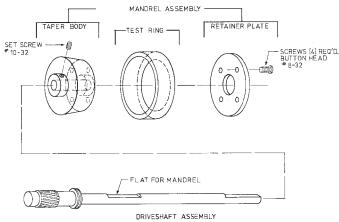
Ring and Mandrel Assembly (Cylinder)
